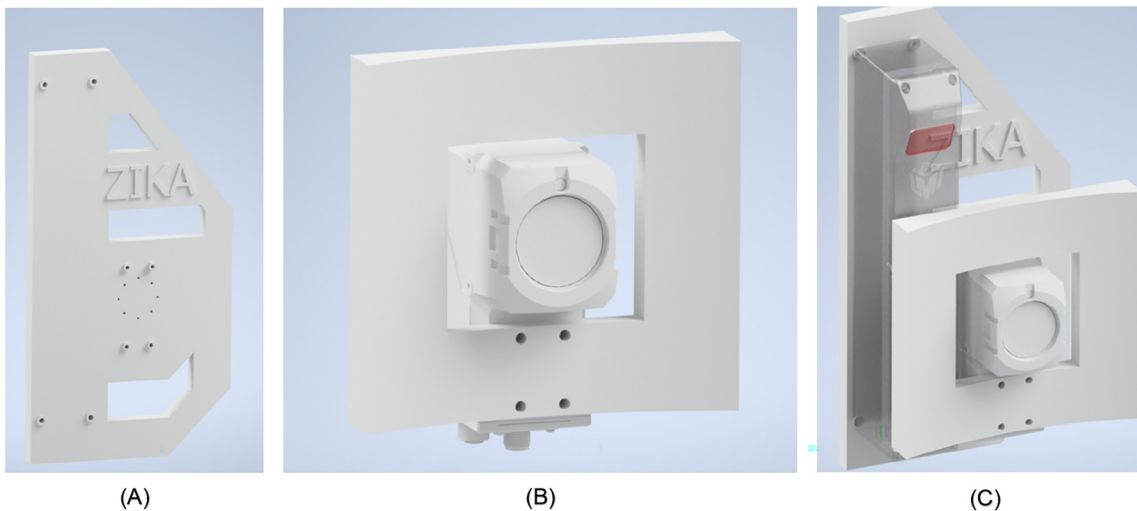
Improved optical inspection attachment. (A) Mount for robot, (B) Camera with light piece, (C) Complete setup.
